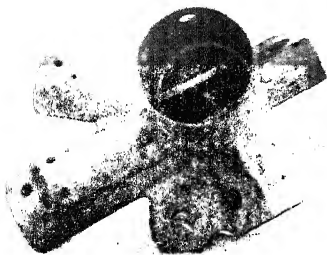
CAPRONI 101—FUSELAGE JOINT PIECE
